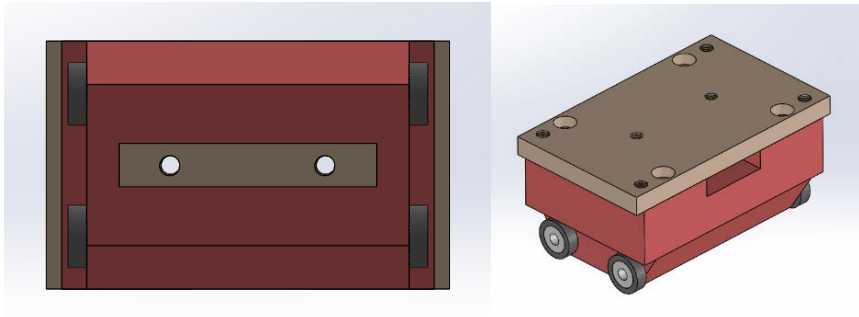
5 Prototype static balancing scanner for inspection of pipe welding
